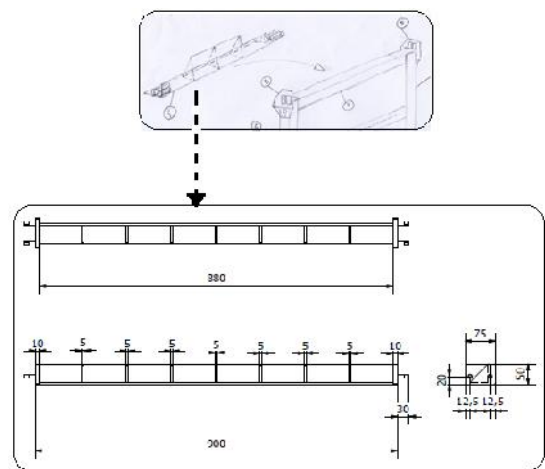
An example of transforming sketch drawing into technical drawing for the clamping component with minor modification for reinforcement and end-support. As reported by the drafter, the sketch is helpful not only to give initial impression for dimensioning but also to improve the design based on ease of manufacturing.
